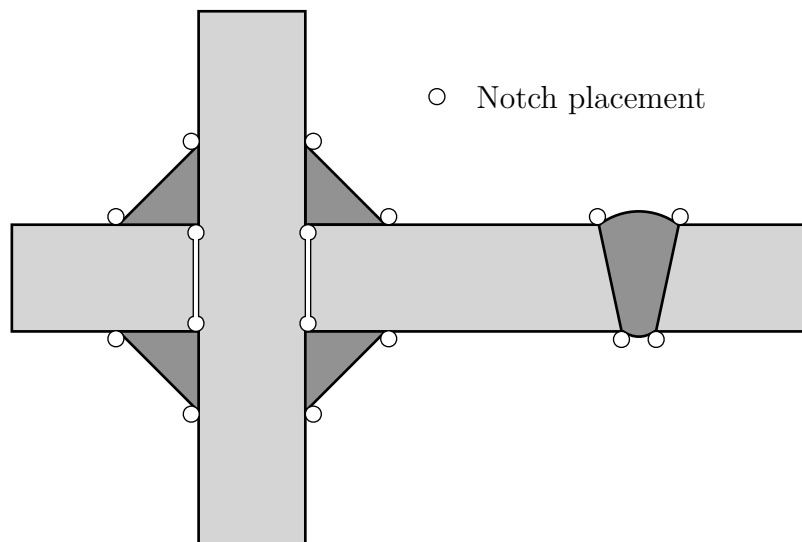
Notch placement in welded components. Adapted from [4].
